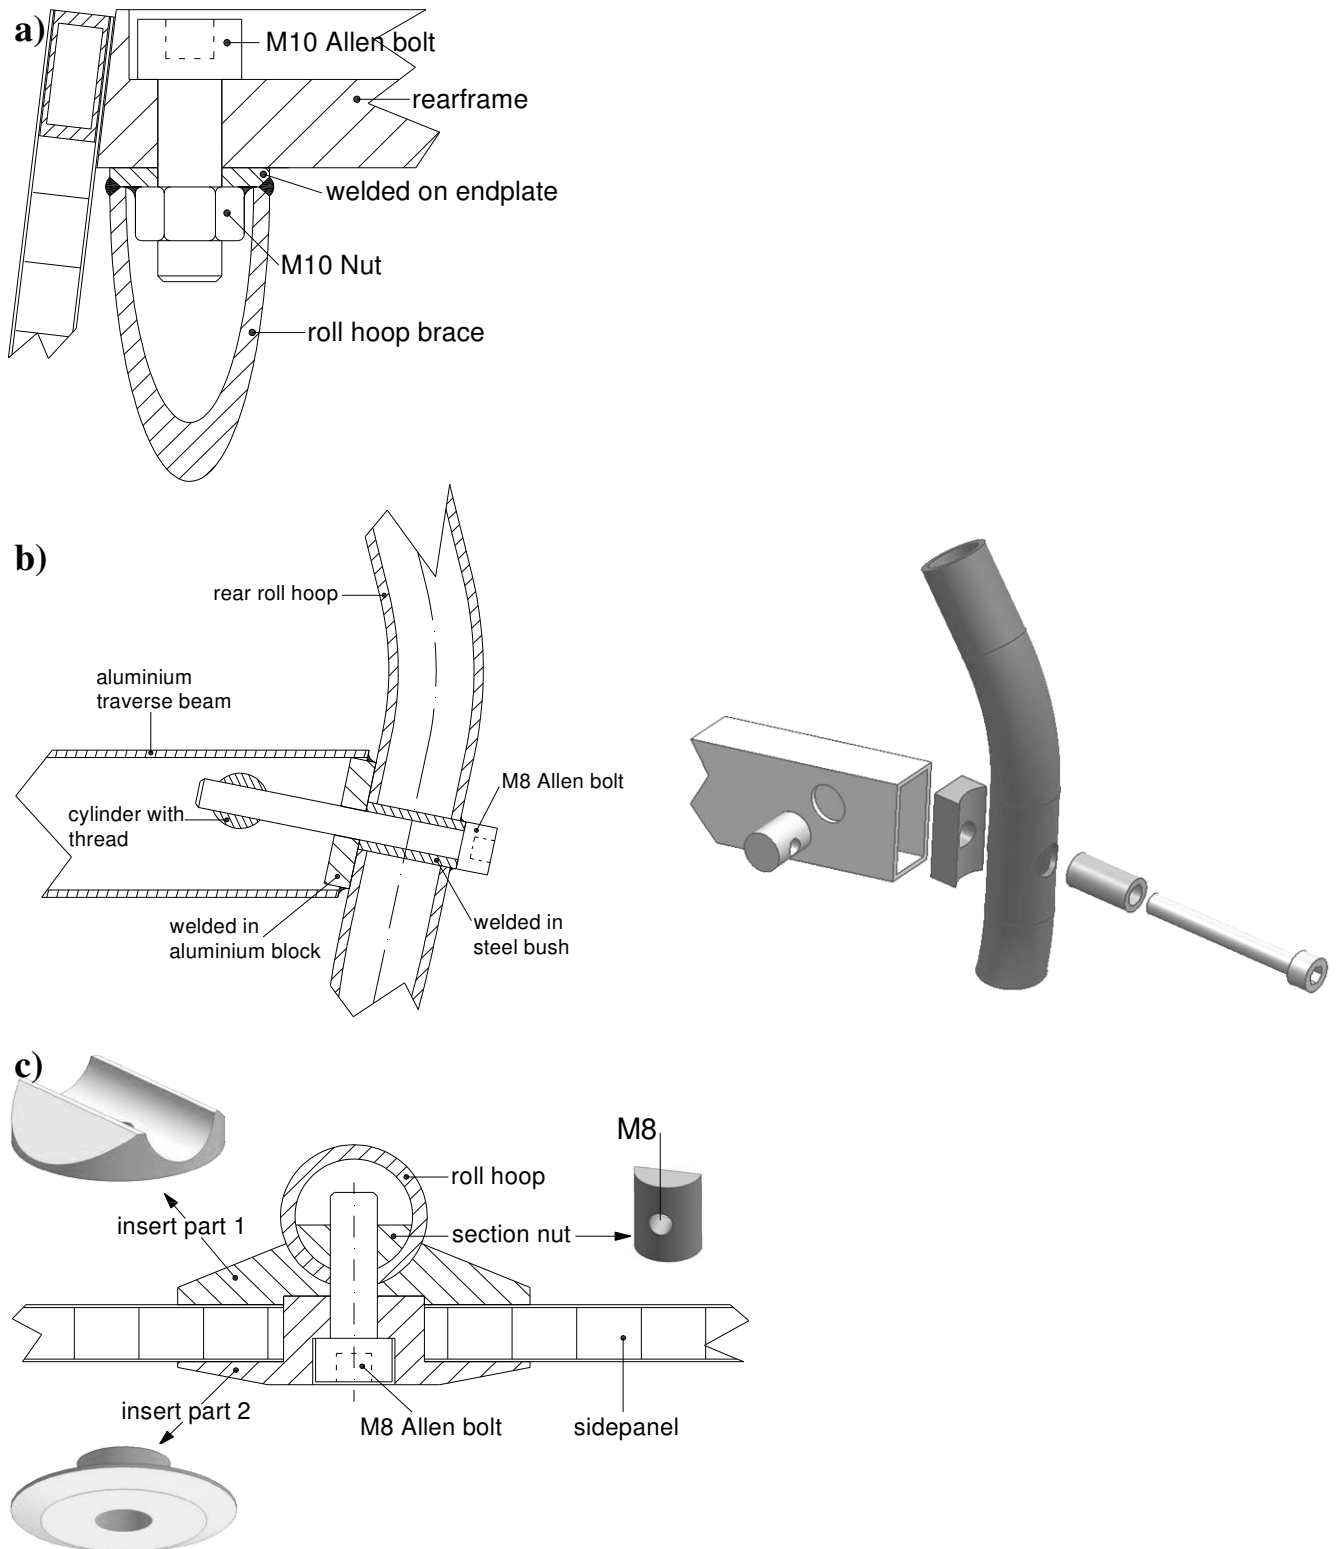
a: Cross section plane a b: Cross section plane b c: Cross section plane c
